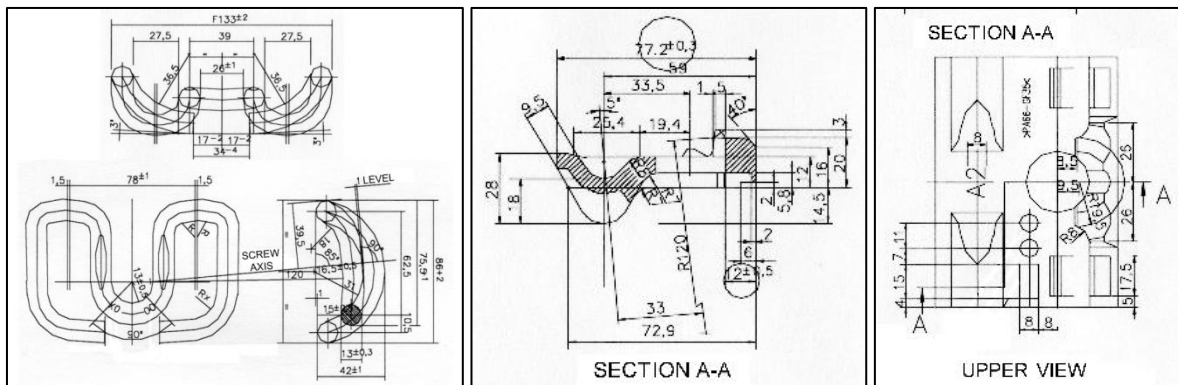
SKL-1 RAIL CLAMP (LEFT) AND A-2 ANGULAR GUIDE PLATE /CENTER AND RIGHT) [DIMENSIONS IN MM]
